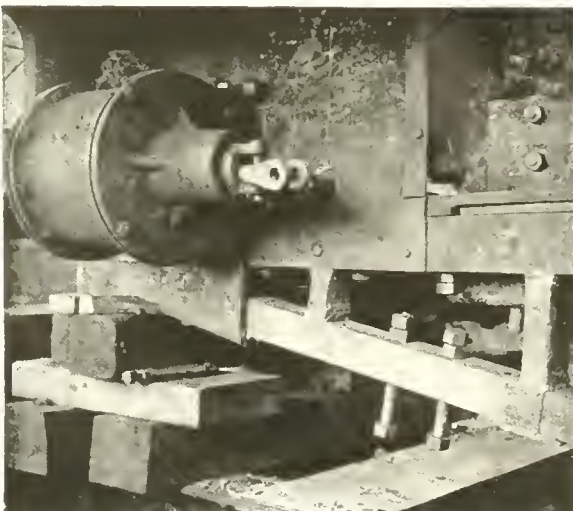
A Locomotive Side Frame with five separate welds in it. A patch on the mud ring can also be seen.
